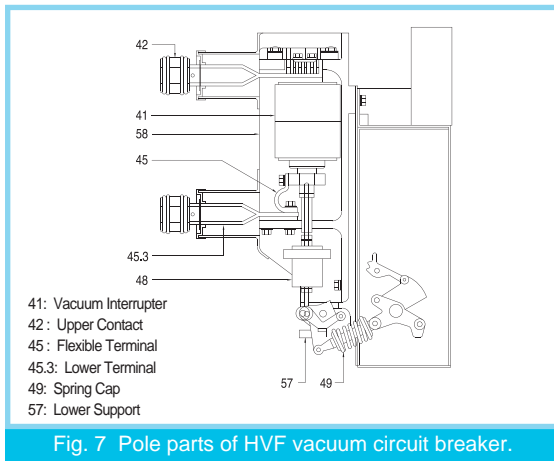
Pole parts of HVF vacuum circuit breaker.
